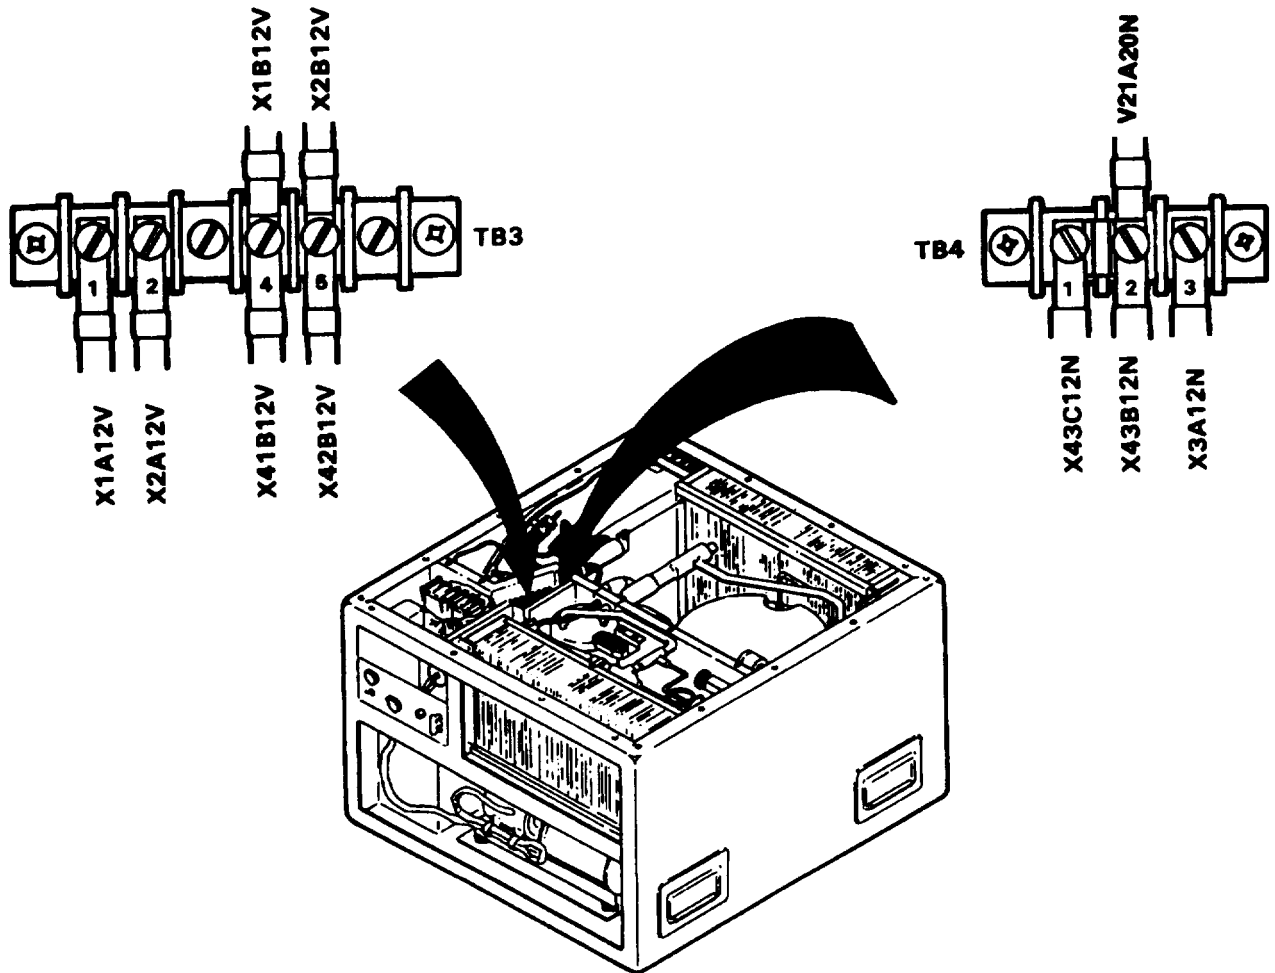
Connector J11 Wired at Terminal Board TB3 (Single Phase)
